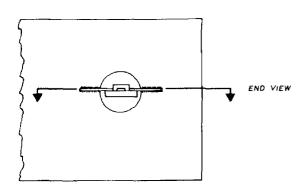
Layout of the center partition and transistor mounting plate. The two pieces are sandwiched together with 2-56 machine screws as shown in the photographs. Material is 0.020" (0.5-mm) brass or copper.
